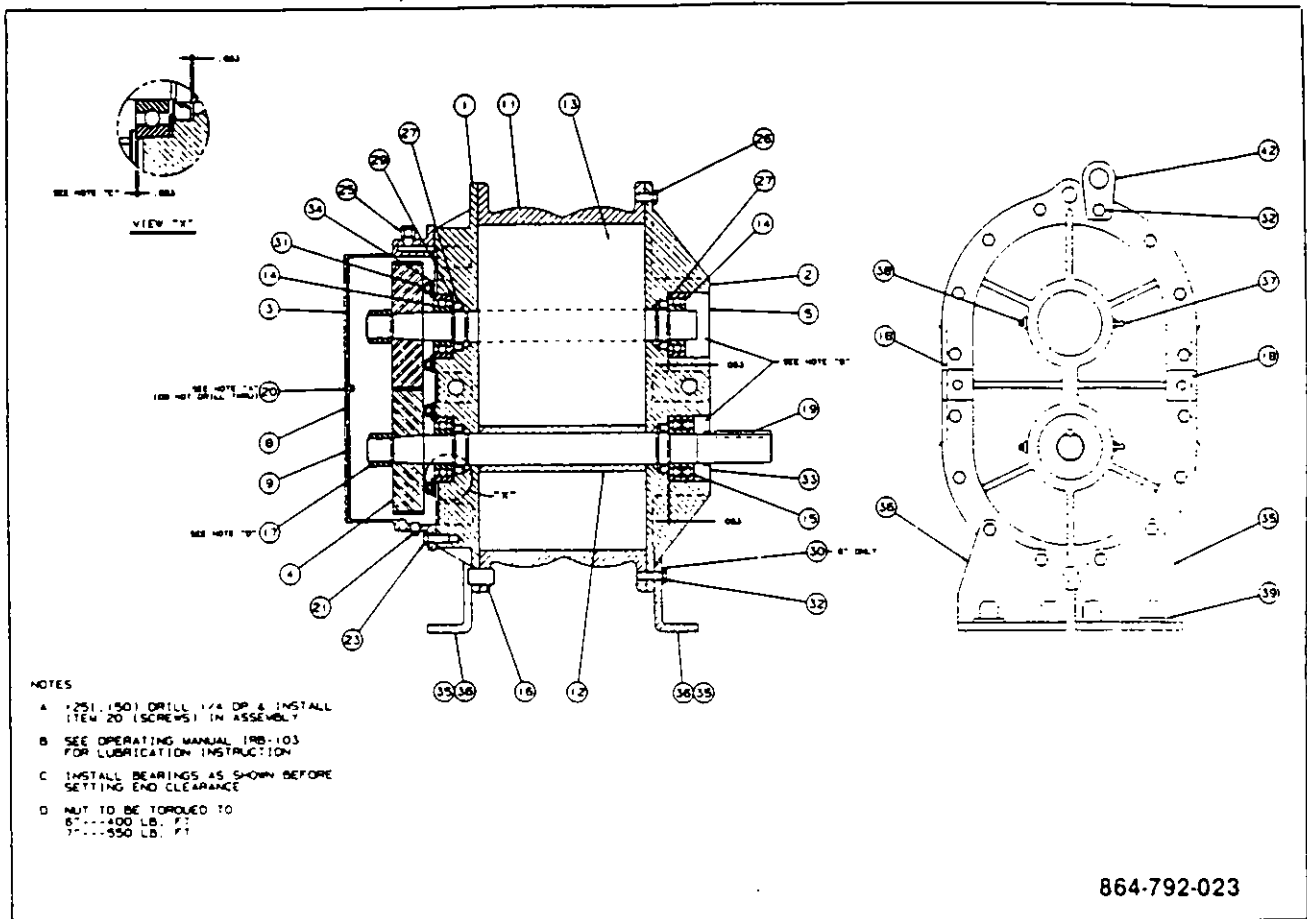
Assembly of UNIVERSAL RAI® Blowers, 6" and 7" Gear Diameter
